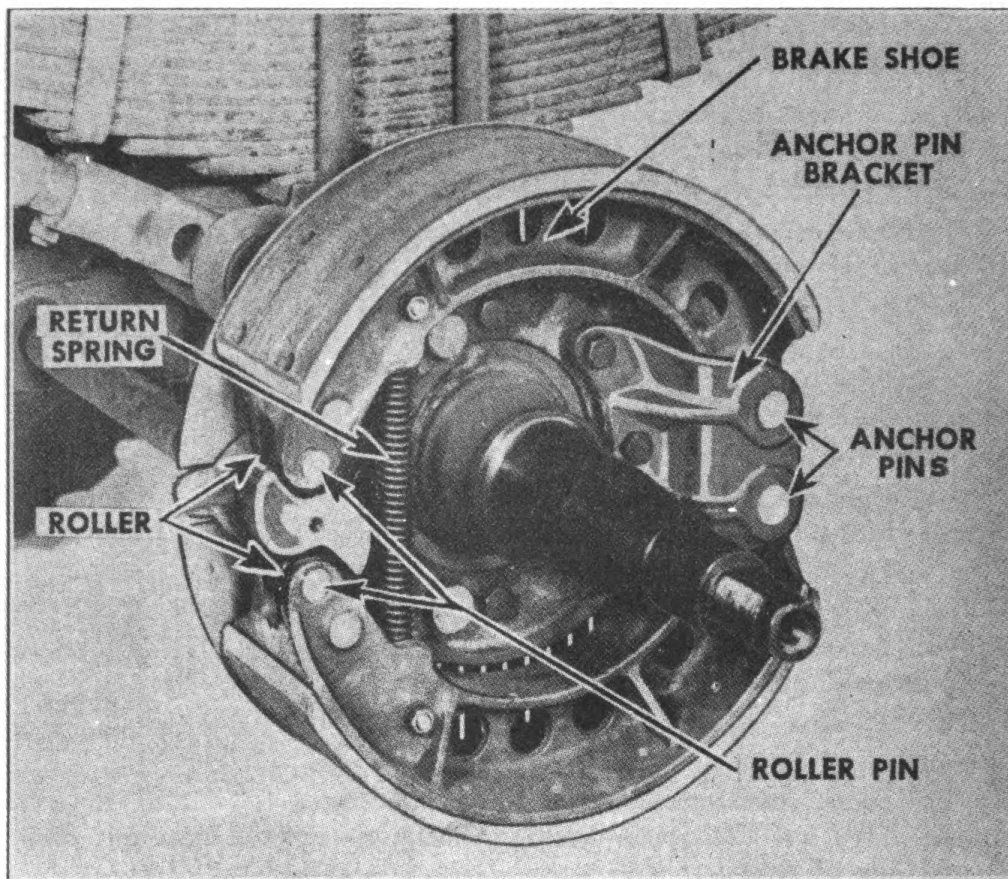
REMOVING BRAKE SHOE—FRONT
